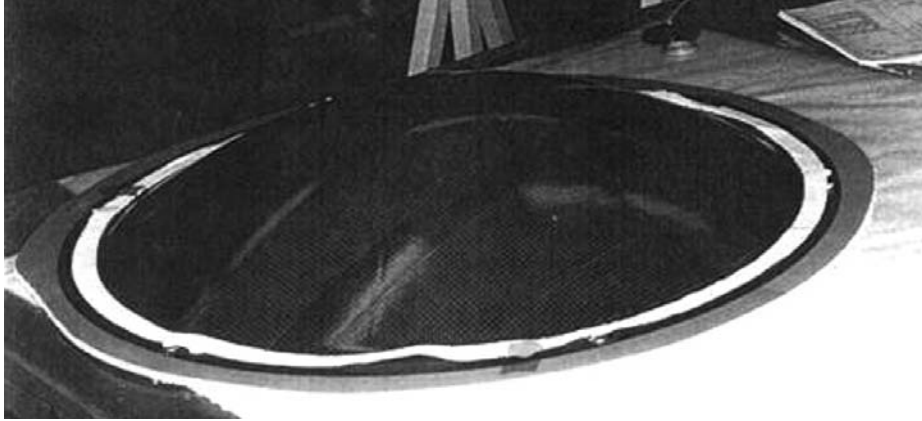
Cassini Ku-/Ka-band FSS engineering breadboard on mold.
